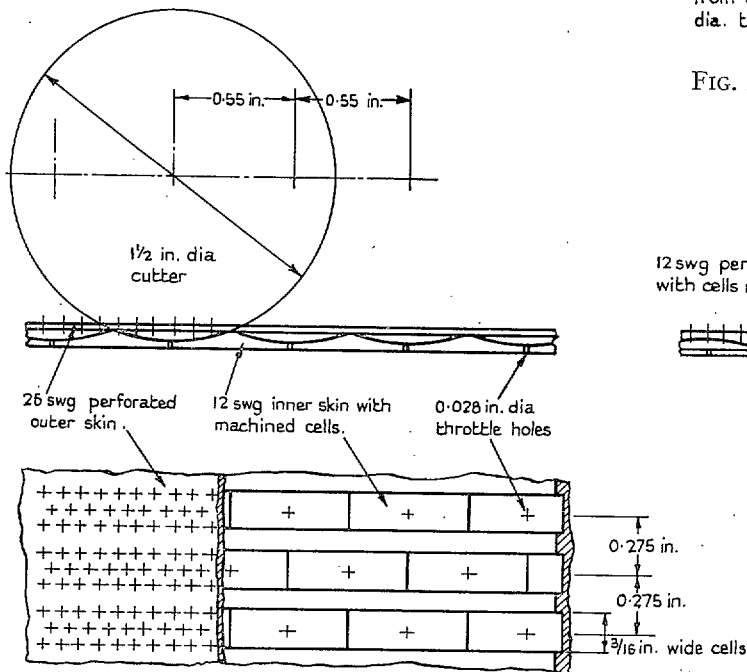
Constructional details of perforated strip on H.P. panel 1
